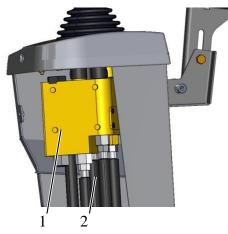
1 Pilot valve 2 Hydraulic oil pipe
